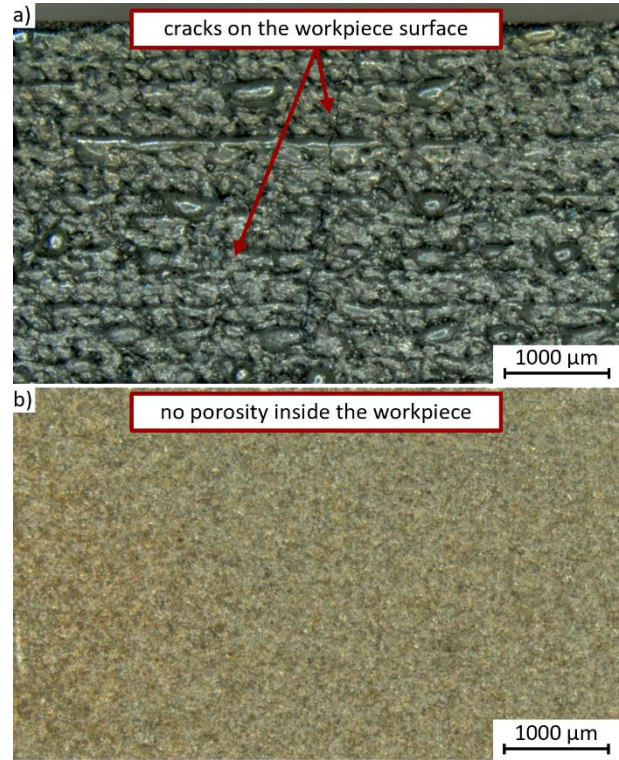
Microscopic images of the CuSn40 workpiece manufactured at $P_L = 240$ W and $t_{exp} = 60$ μ s; a) Workpiece surface; b) Cross-section of the workpiece.
